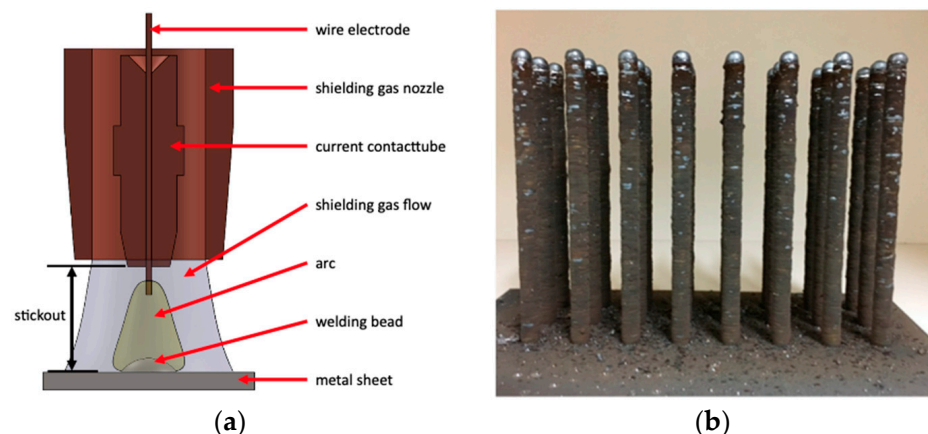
Steel printing concept of generating steel rebars automatically while printing the concrete: (a) gas-metal arc welding system and (b) printed steel [55].
